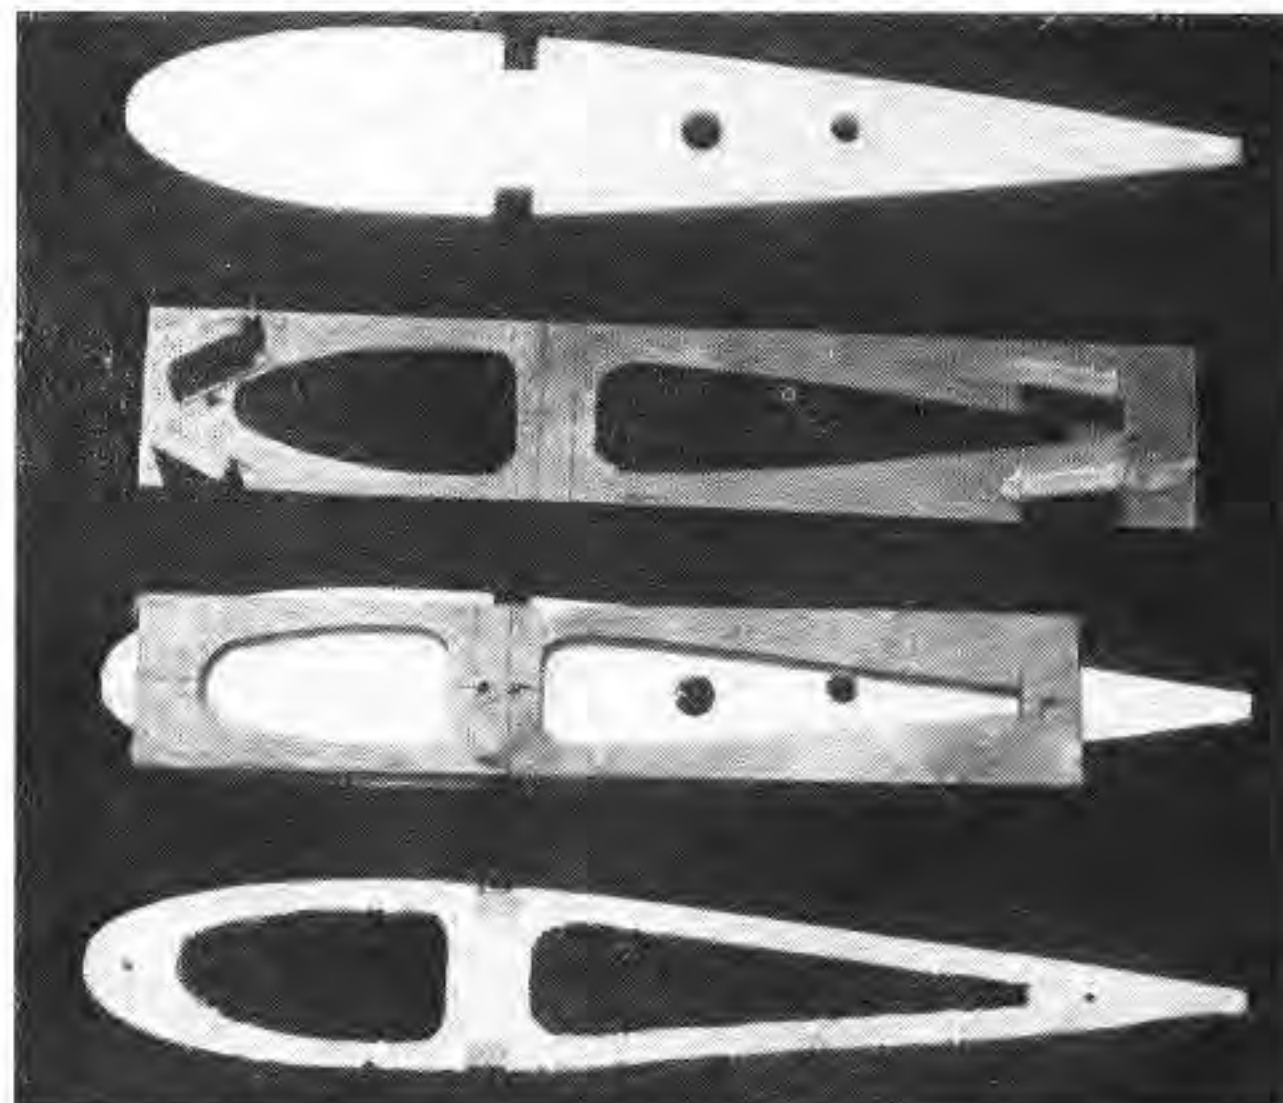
Jig for forming hole in foam blank for passage of hot wire when cutting voids.
